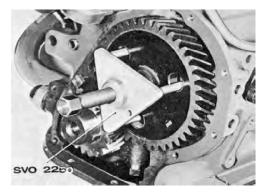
Removing the camshaft drive (4-cyl. engine)
